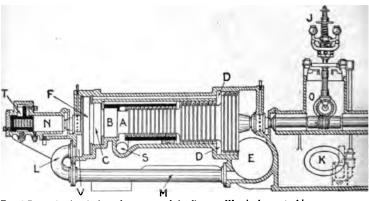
,752.—Sectional view of governor of the Parsons-Westinghouse turbine.
